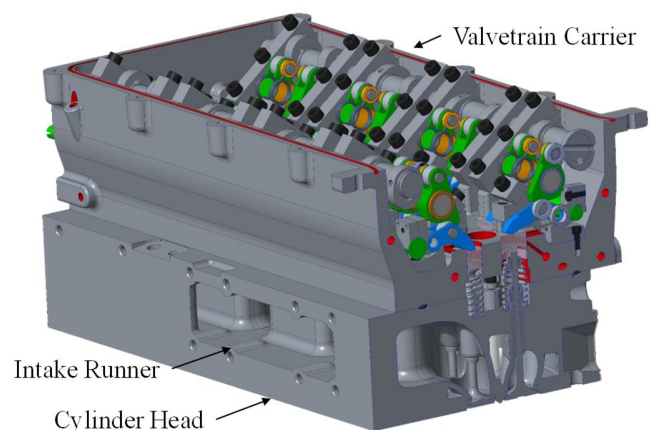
Modified cylinder head with dual fully variable valvetrain (view from intake side)
